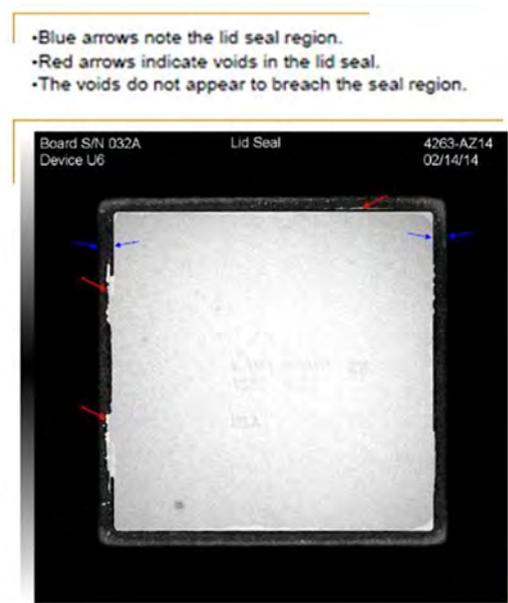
C-SAM images for a hermetically sealed CGA 1272 I/O assembly showing heat sink seal integrity. Blue arrows show the lid seal region and red arrows show areas with voids.
